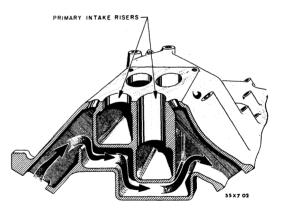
Exhaust Cross-over Passages Throught Intake Manifold (Double Rocker Shaft Engine)
